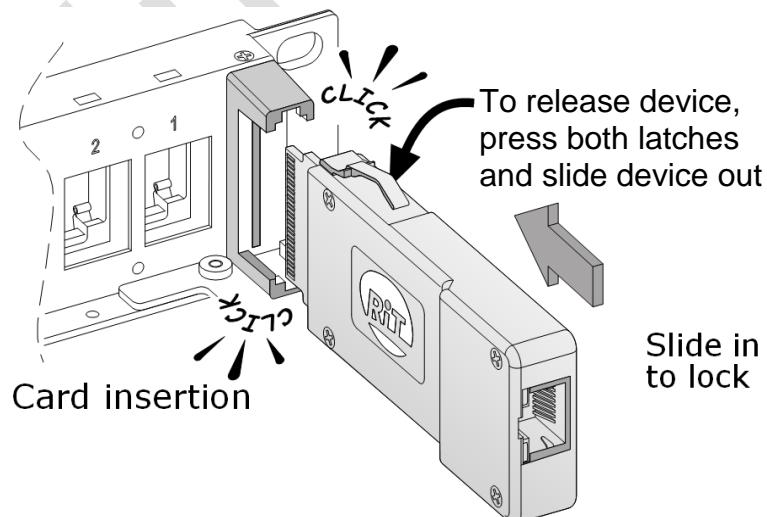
Copper Frame, rear with Smart Scanner and socket
